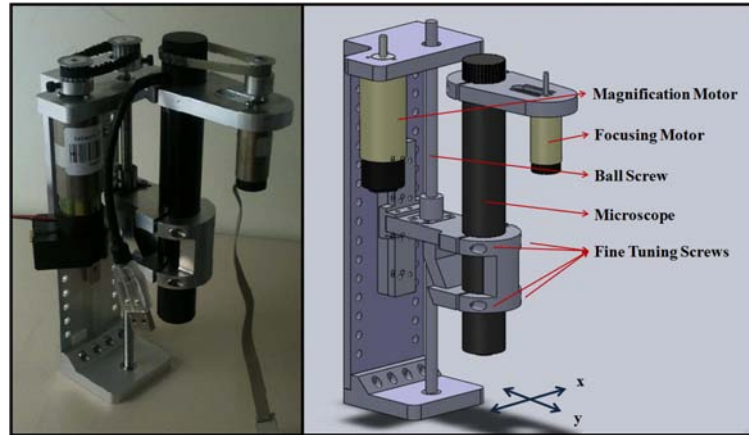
Produced Image Acquisition Setup and its CAD Drawing
